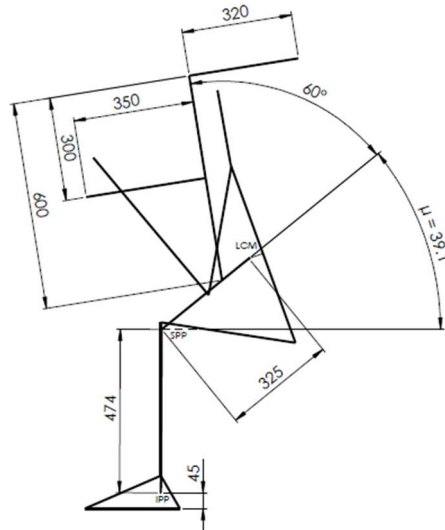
Geometry and Dimensions of HTS3 Mechanism
